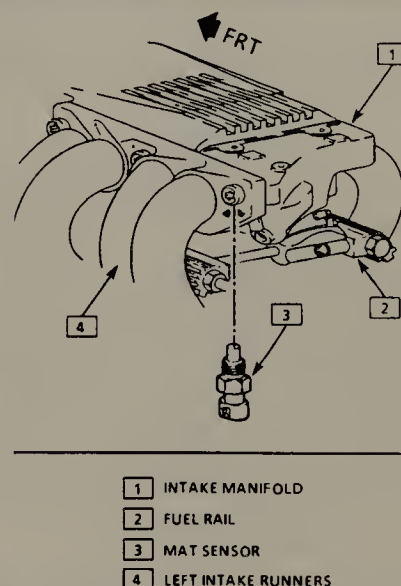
On VIN 8 engines, the MAT (or IAT) is mounted in the intake plenum
